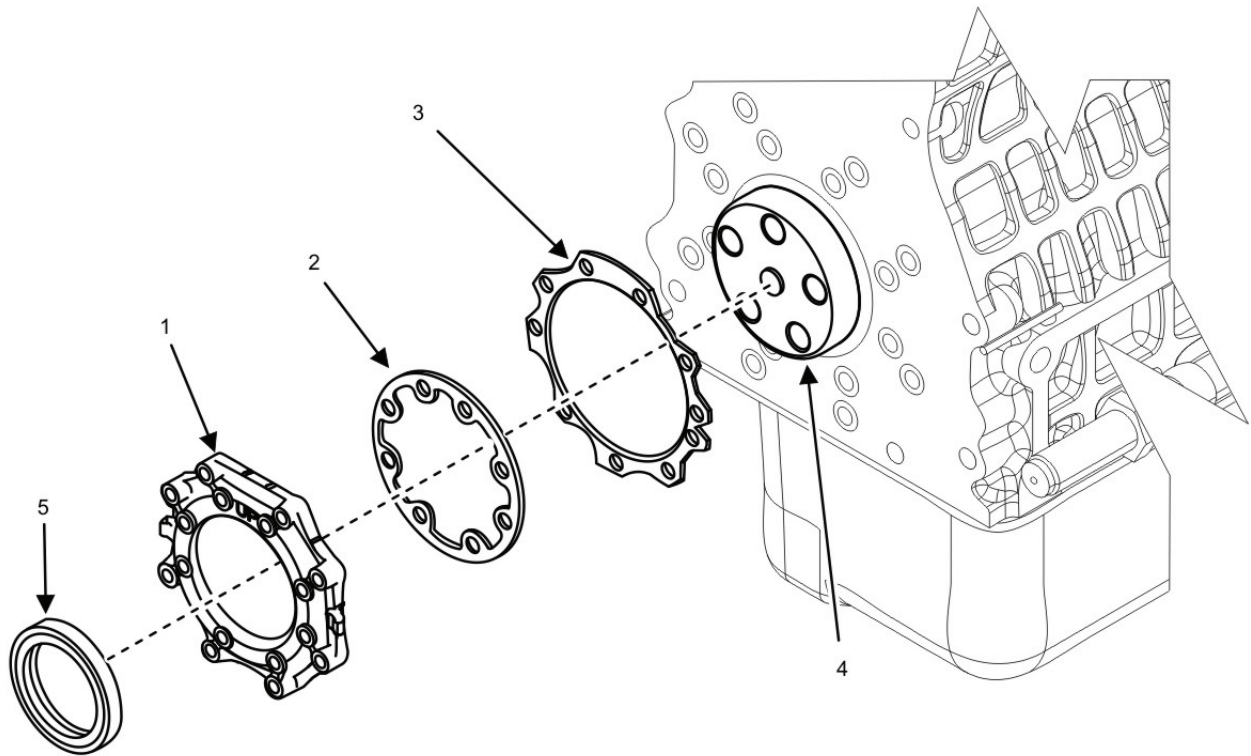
Crankcase Rear Bearing Case Cover — Removal.
